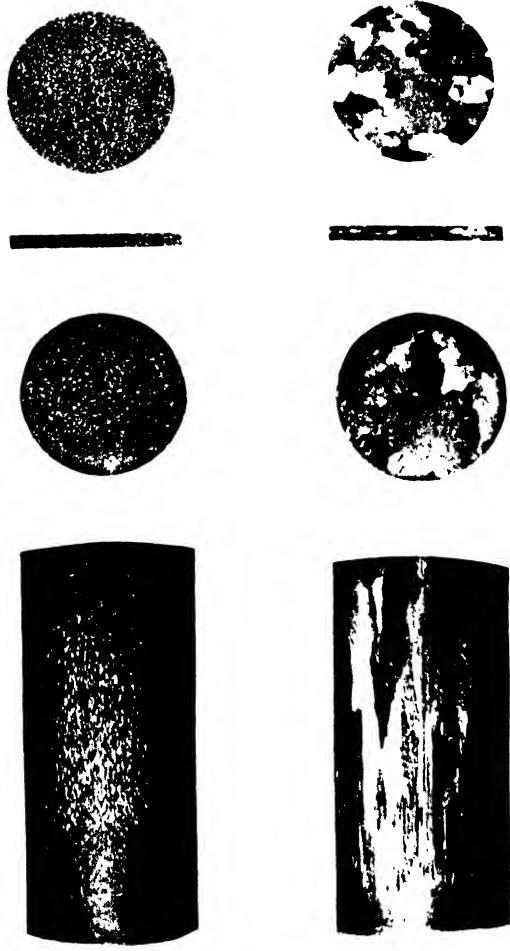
Impact extruded aluminium shells from blanks with different grain-size. The macro-etchings show, starting from the top, the surface and section of the blanks, and the base and side of the extruded shells.
